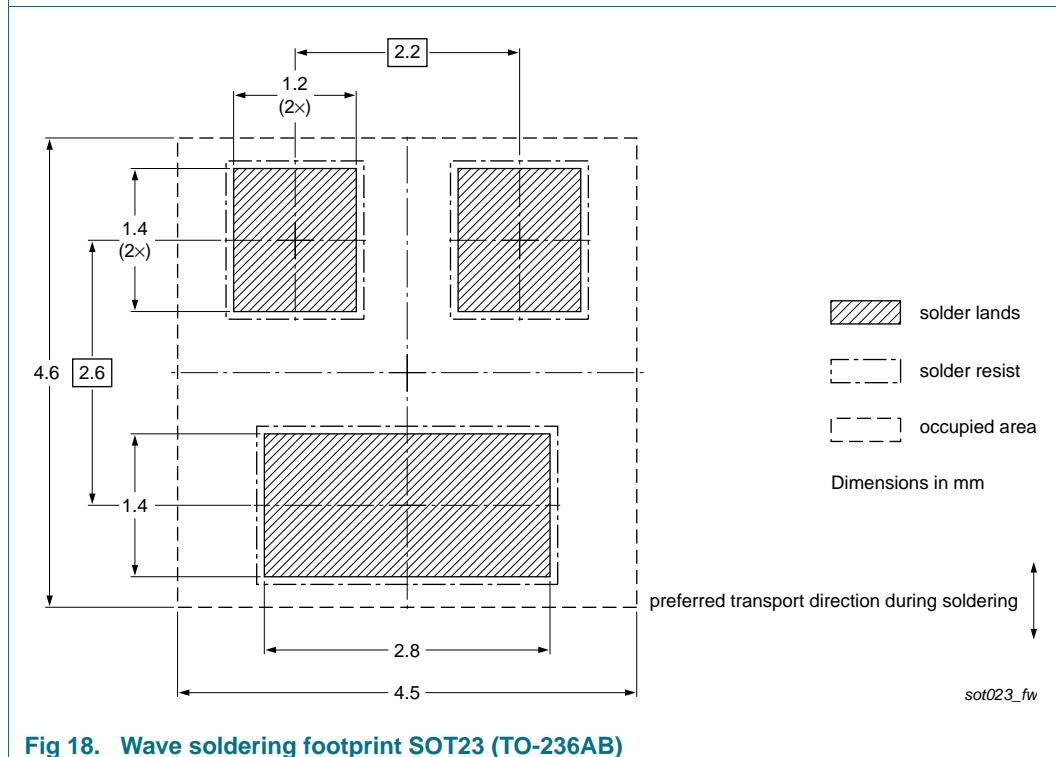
Wave soldering footprint SOT23 (TO-236AB)
